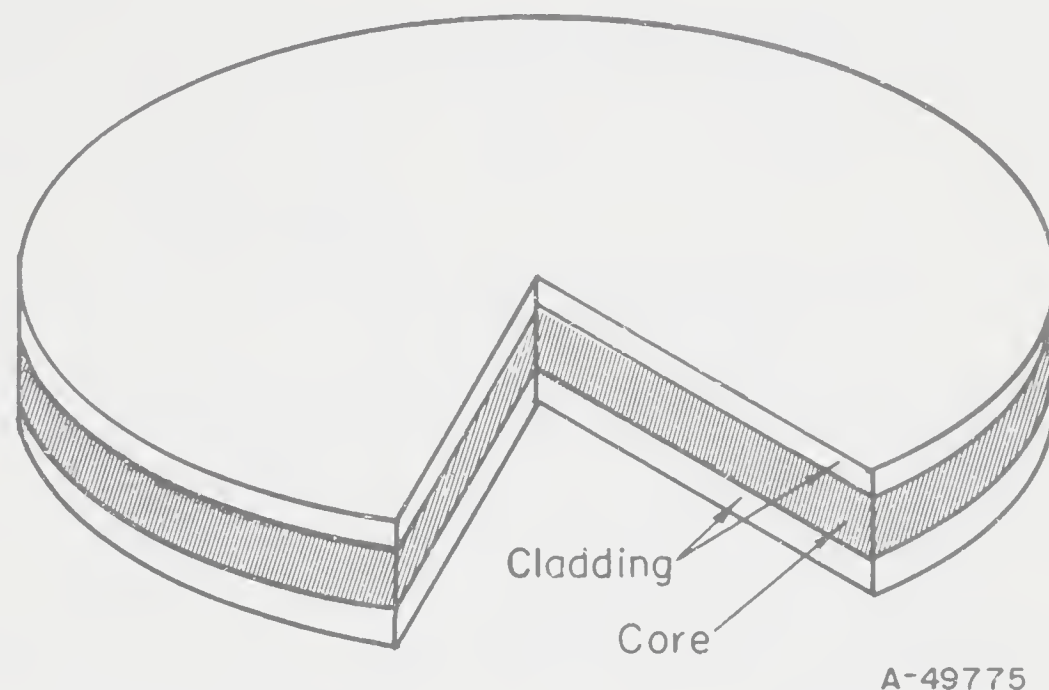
MULTILAYER COMPOSITE COIN BLANK
